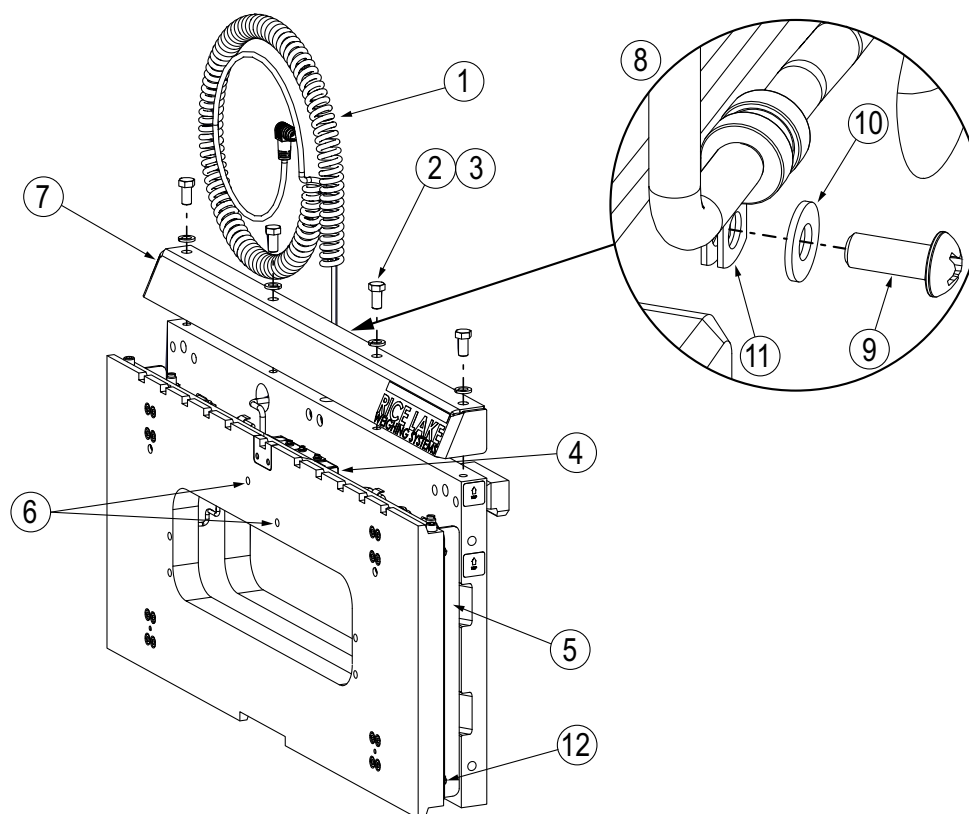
CLS Assembly Parts Illustration (PN 226802)
